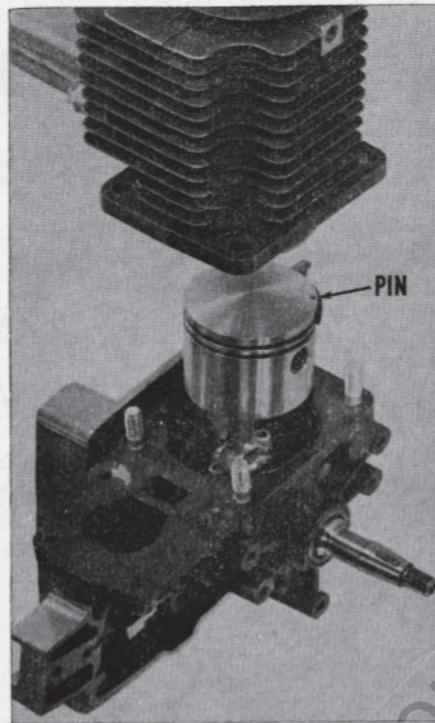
Piston and connecting rod assembly can be removed from crankpin after removing cylinder from crankcase. Note piston ring locating pin on intake side of piston.
